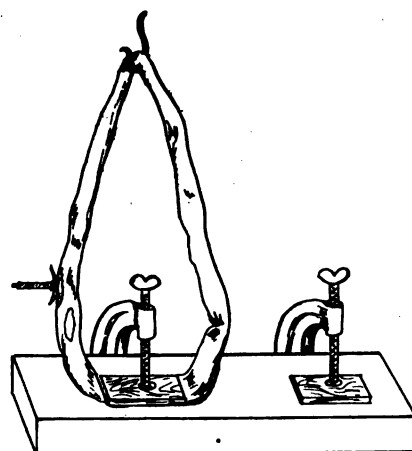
HOW TO CLAMP THE TUBE TO THE VULCANIZER
